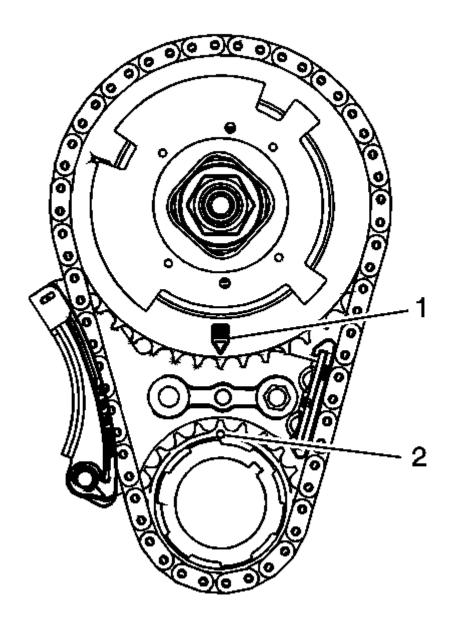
View Of CMP Actuator Alignment Mark & Crankshaft Sprocket Alignment Mark
